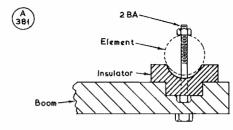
An end-view of the boom-and-insulator assembly, using TV aerial tubing, clamps and insulating elements. The tube endings are fitted with wooden plugs so that bolting-up does not flatten the tubing.
